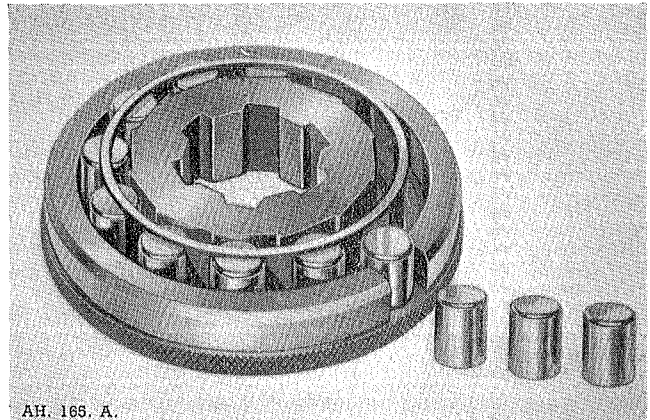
Using tool 18G 173 for assembling the roller clutch
